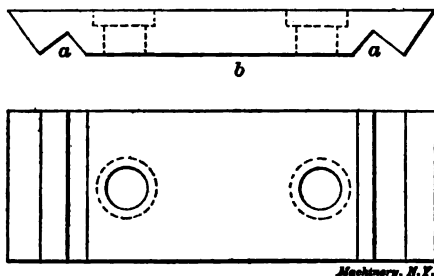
Methods Used for Accurately Finishing a Milling Machine Knee.
